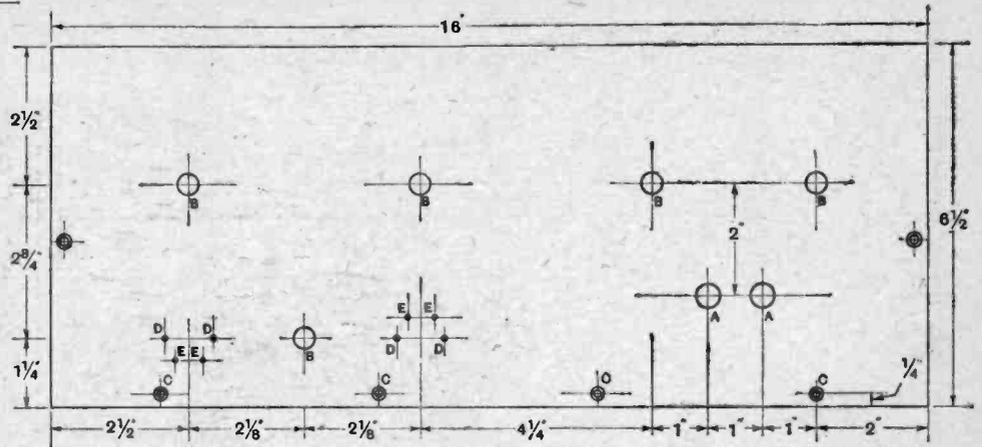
Drilling details of the front panel. Sizes of holes are as follow: A, 3/8in. dia.; B, 7/16in. dia.; C, 1/8in. dia., countersunk for No. 4 wood screws; D, drilled and tapped for No. 6 B.A. screws; E, 1/16in. dia.
